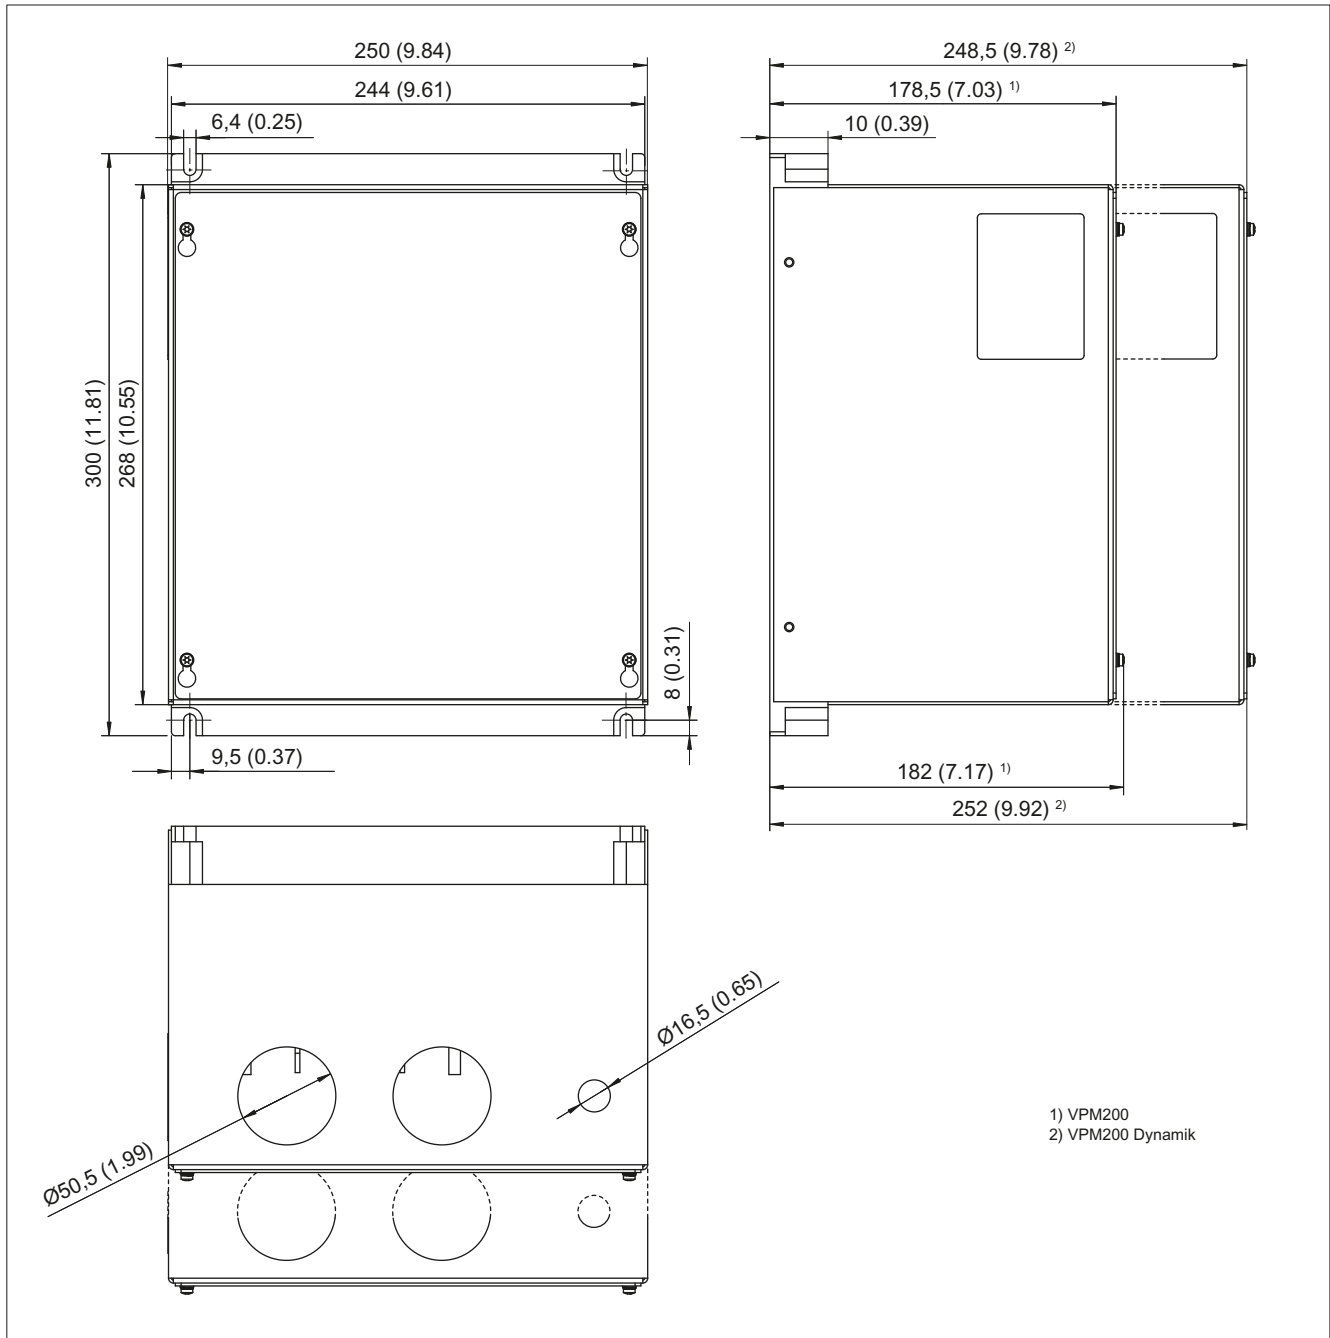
Dimension drawing for VPM 200 and VPM 200 DYNAMIC, all dimensions in mm and (inches)
